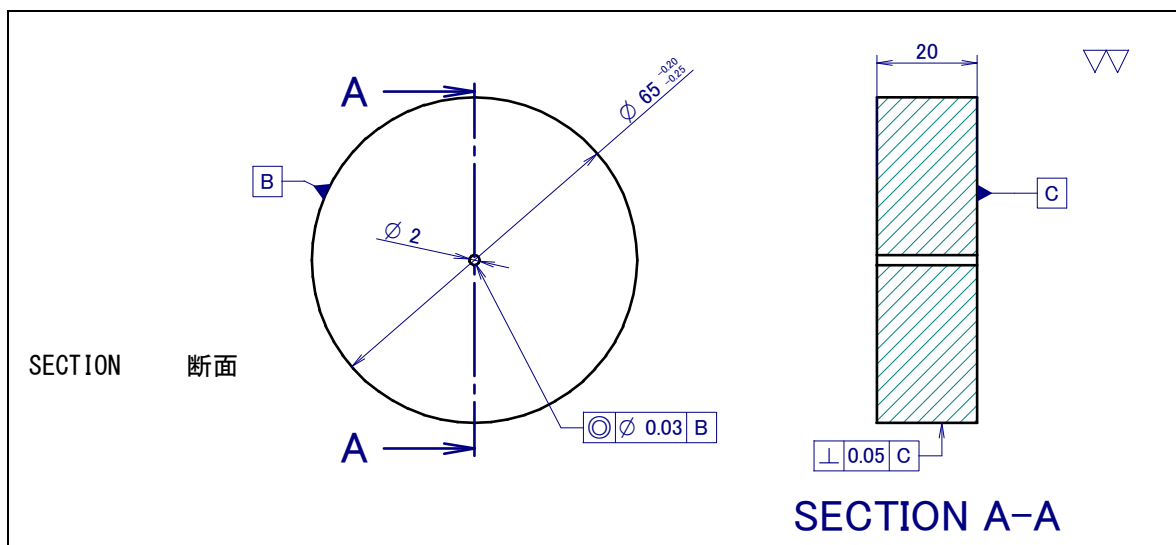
(q) Adapter for follower unit (insulated flange) (Spec: A290-7220-X975)
